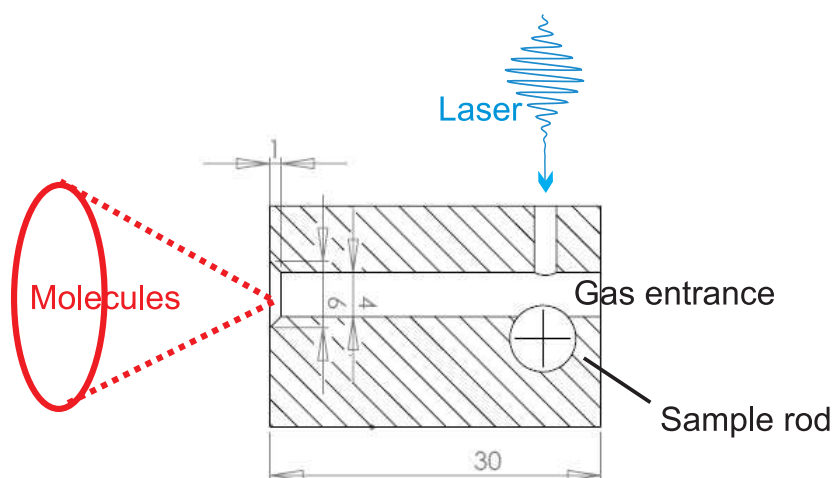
Drawing of the straight mixing channel. The sample is pressed onto a rod, which is threaded from the top into the channel (scales are in millimeters). A second version of the mixing channel had a reduced channel with only 2 mm in diameter.
